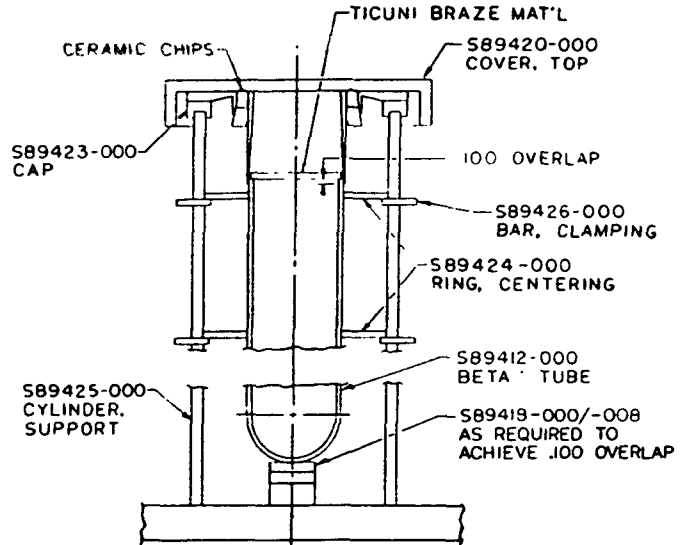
(HEADER & TUBE ASSEMBLY FIXTURE)
